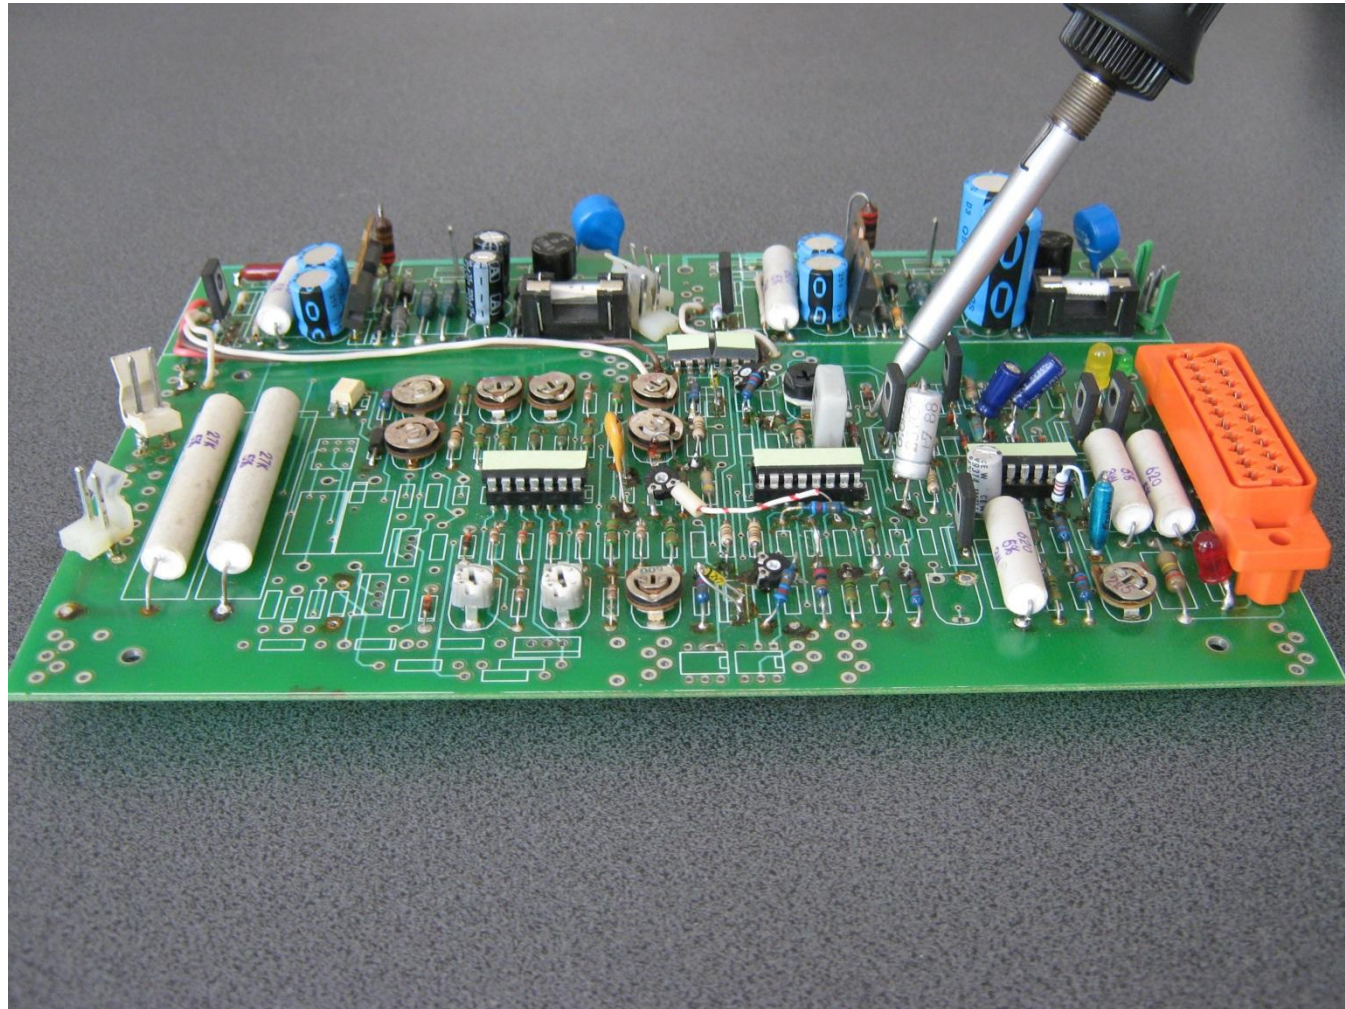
Soldering wire connections and terminal pads on a PCB of a DC servomotor drive
